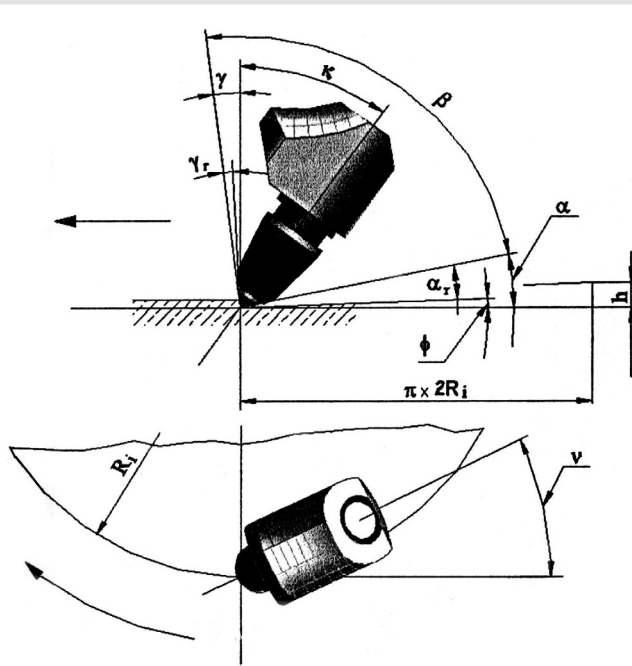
Parameters of cutting and tool setting angle of the rotary tangential tool (Jonak 1998): α – tool clearance, α_r – tool auxiliary clearance, β – blade angle, γ – tool rake angle, γ_r – auxiliary tool rake angle, ν – tool side setting angle, κ – tool setting angle, h – depth of cut, R_i – radius of i – tool
